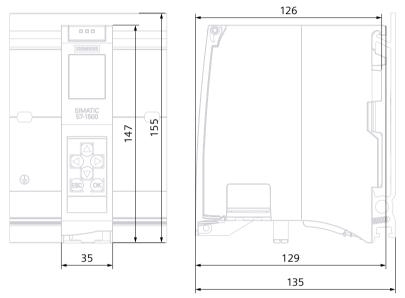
Dimension drawing of the CPU 1513R-1 PN, front and side view
